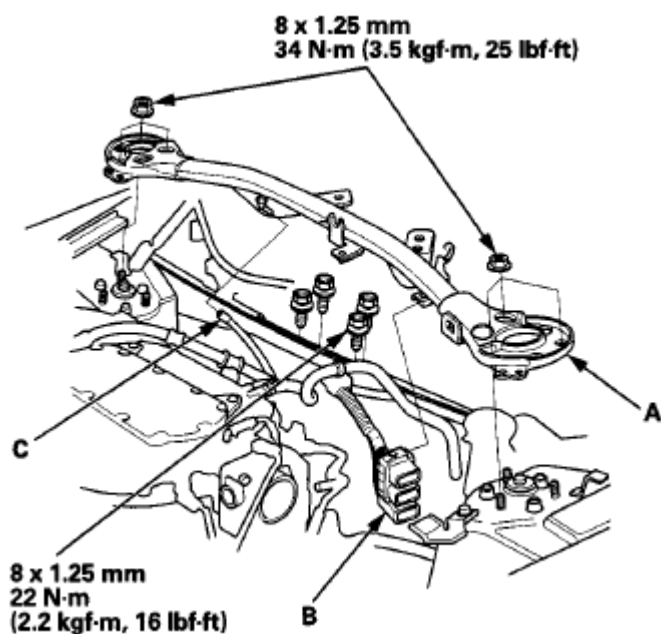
Installing Connector And Transfer Breather Hose With Torque Specifications
